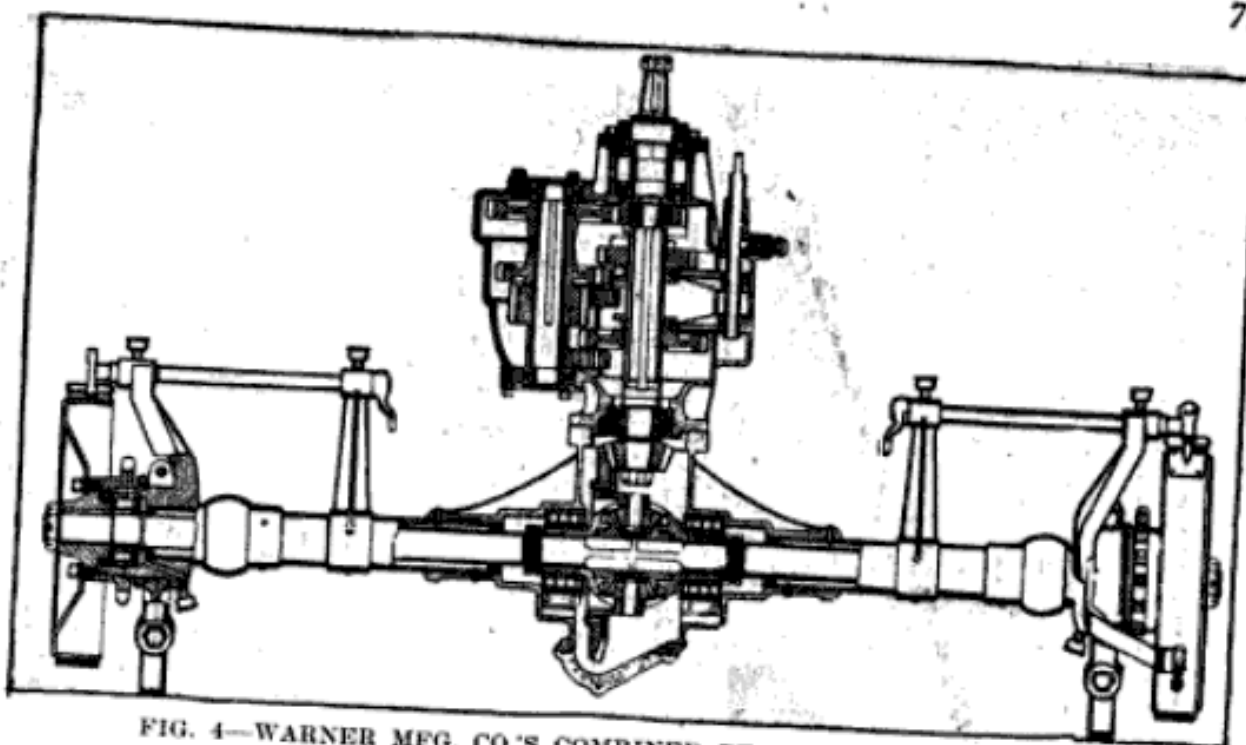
WARNER MFG. CO.'S COMBINED GEARSET AND JACKSHAFT
